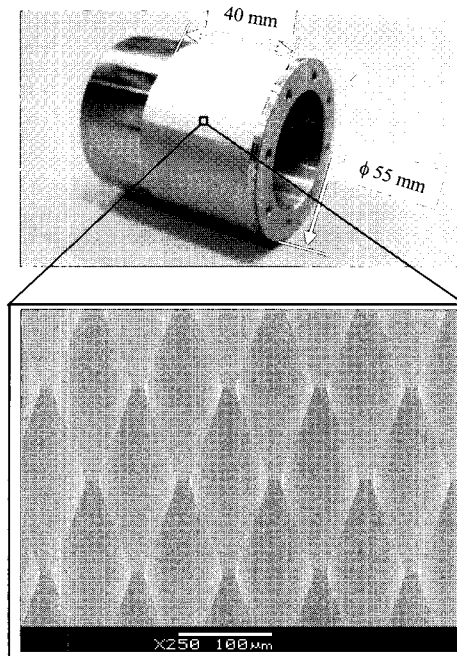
Large-area micro-lens array fabricated on the workpiece
